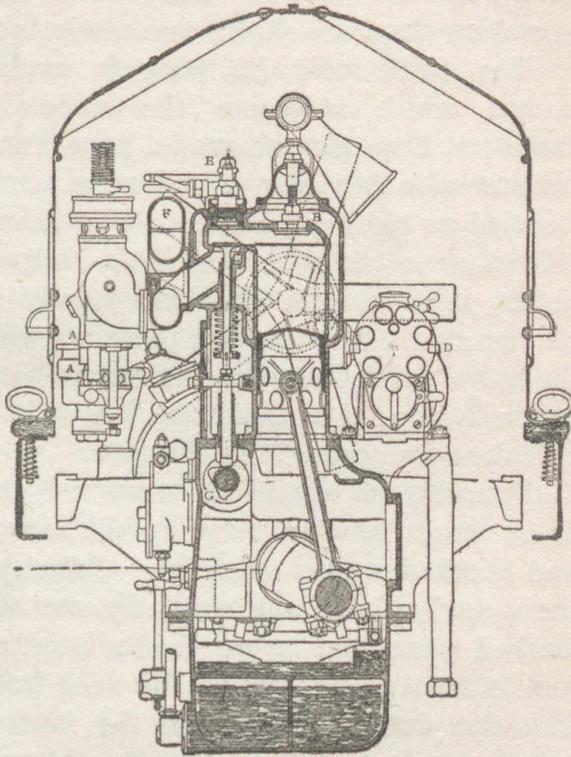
Transverse section of a 24-30 h.-p. engine
